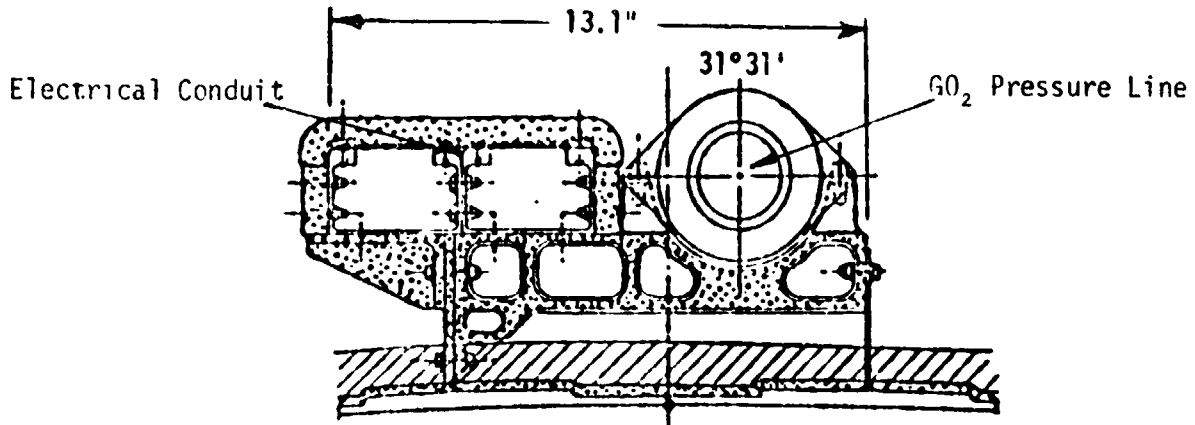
GO_2 Pressure Line - Electrical Conduit Attachment Fittings Type A and Type B and Cross-Sectional Views
